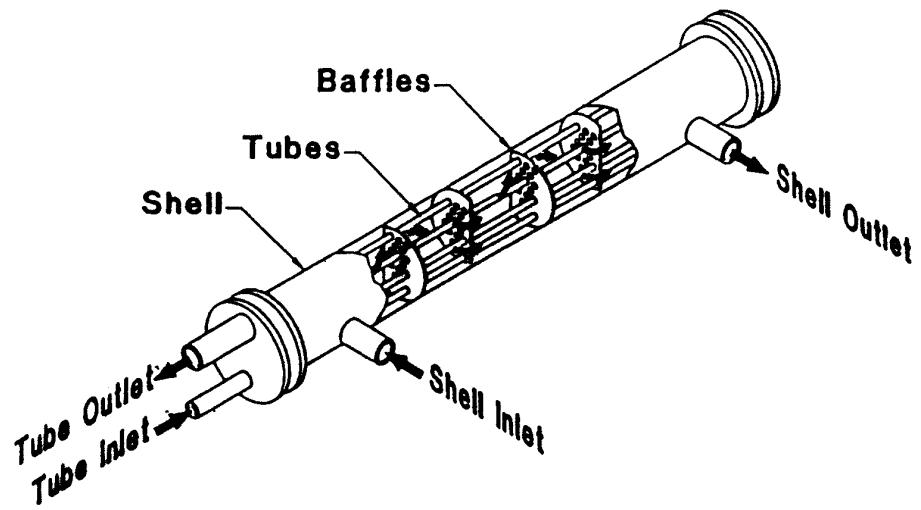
Shell-and-Tube Dry Expansion Evaporator
